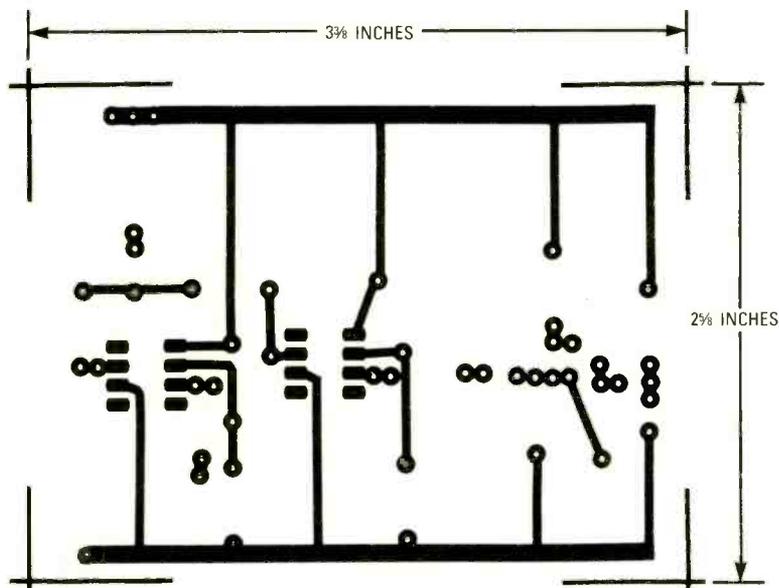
It is recommended that the Ditherizer be assembled on a printed-circuit board; a template for that board is shown here.
